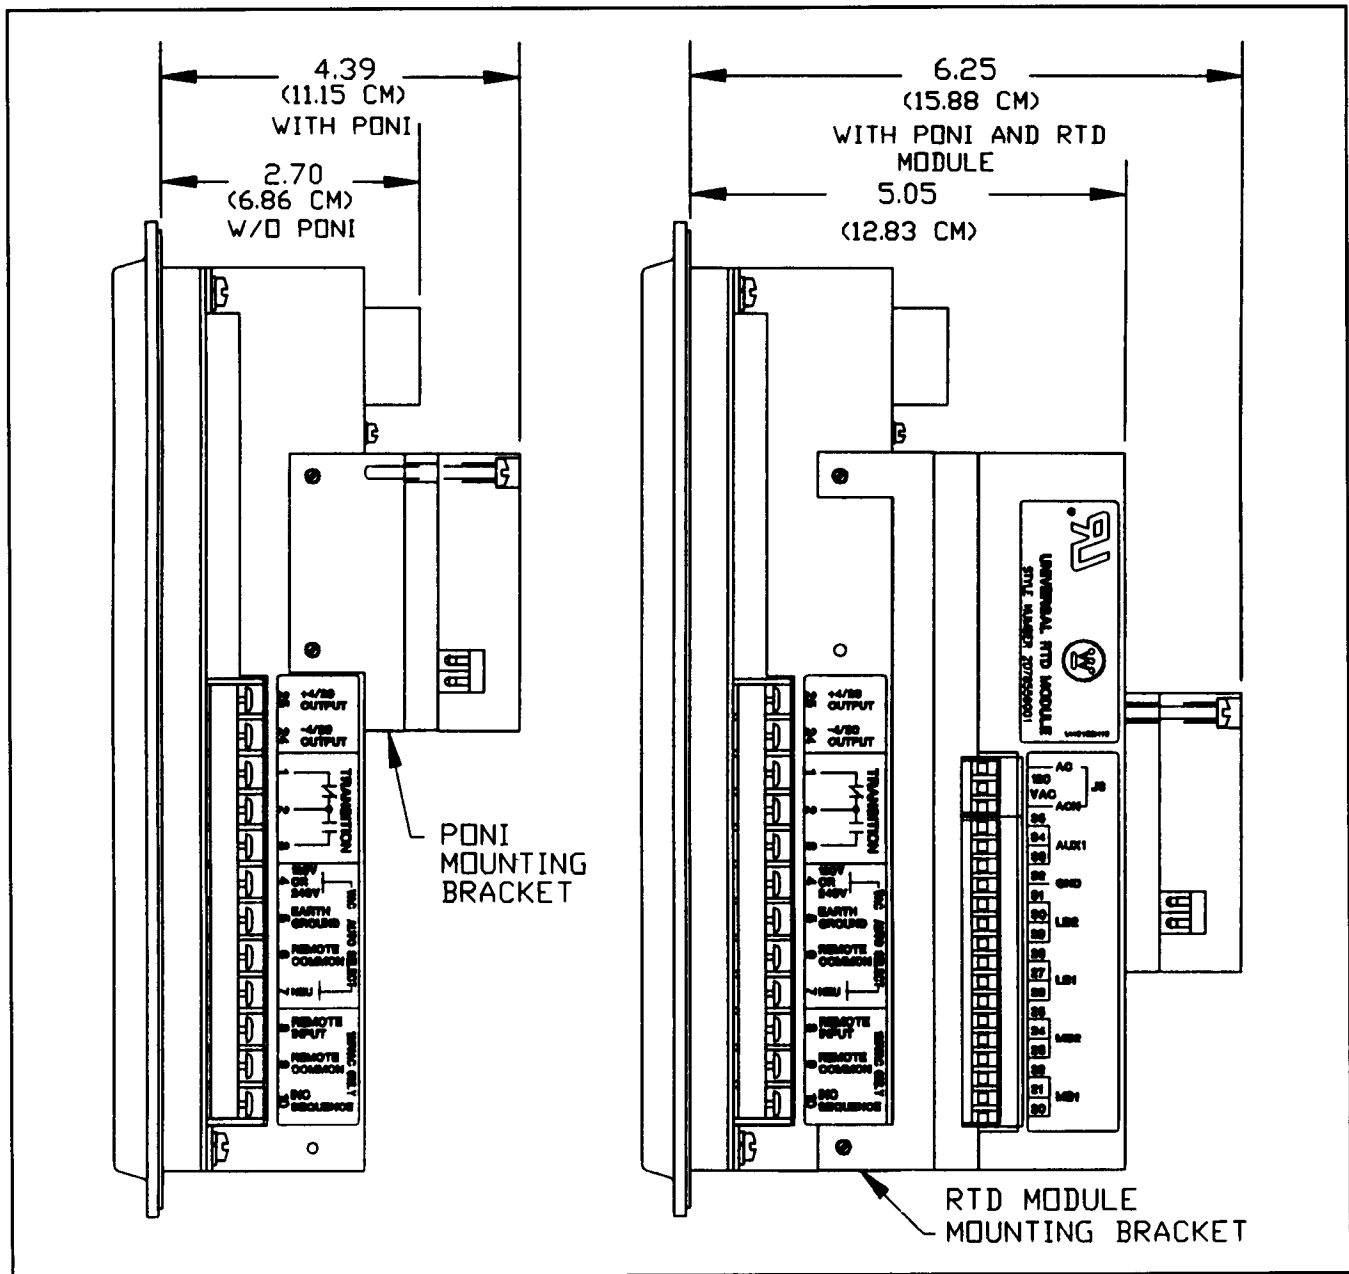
IQ-1000 II Chassis Depth Clearances
